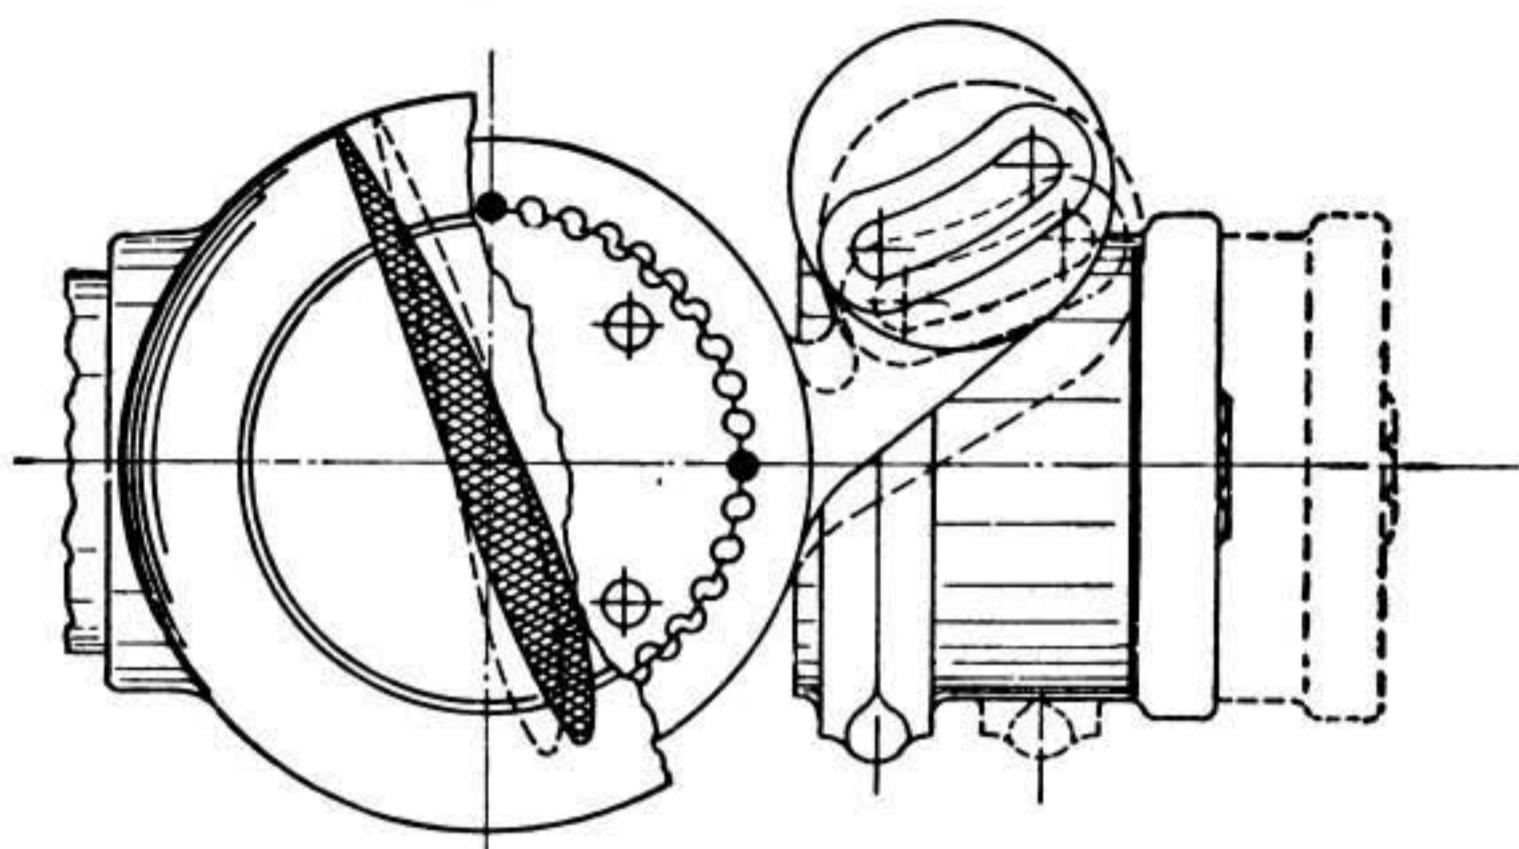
Counterweight bearing-shaft thrust-bearing assembly.
